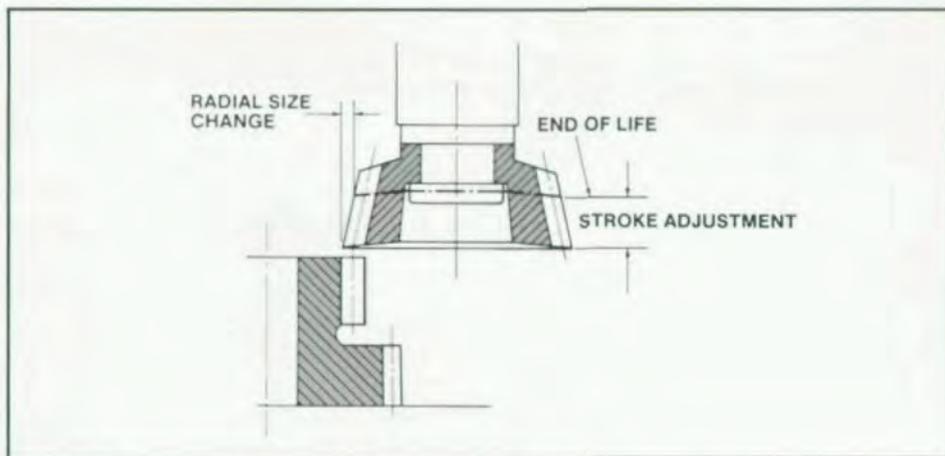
Adjustment requirements in the use of conventional shaper cutters.
